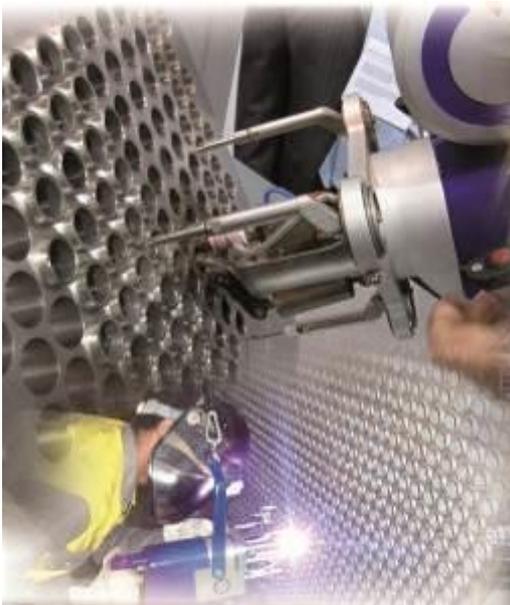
Condenser tube-to-tube sheet welding
